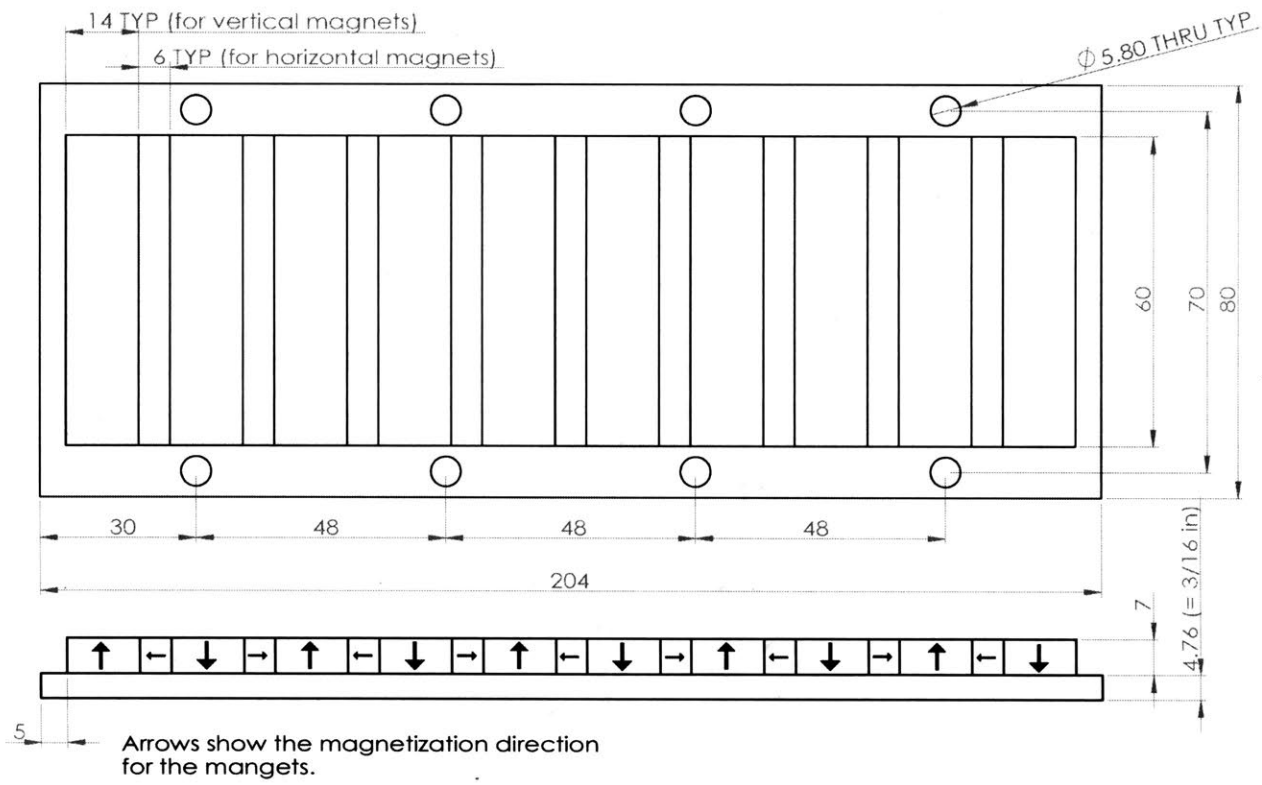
Drawing of the non-skewed magnet track of our new fine-tooth motor. Short version used in the single-sided motor configuration.
